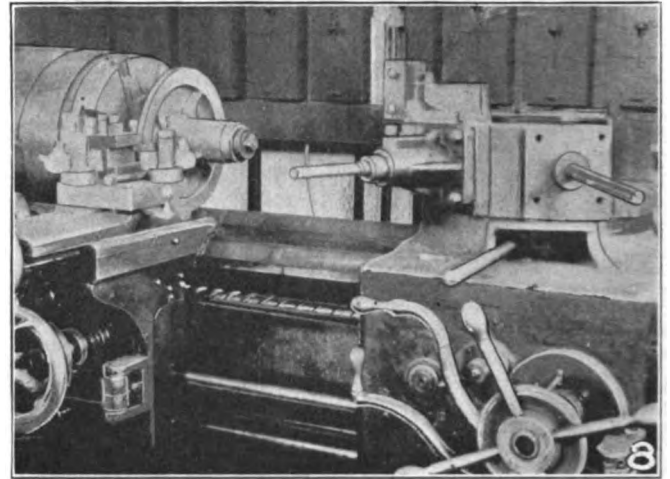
PUMP COVER OPERATIONS IN THE TURRET LATHE
